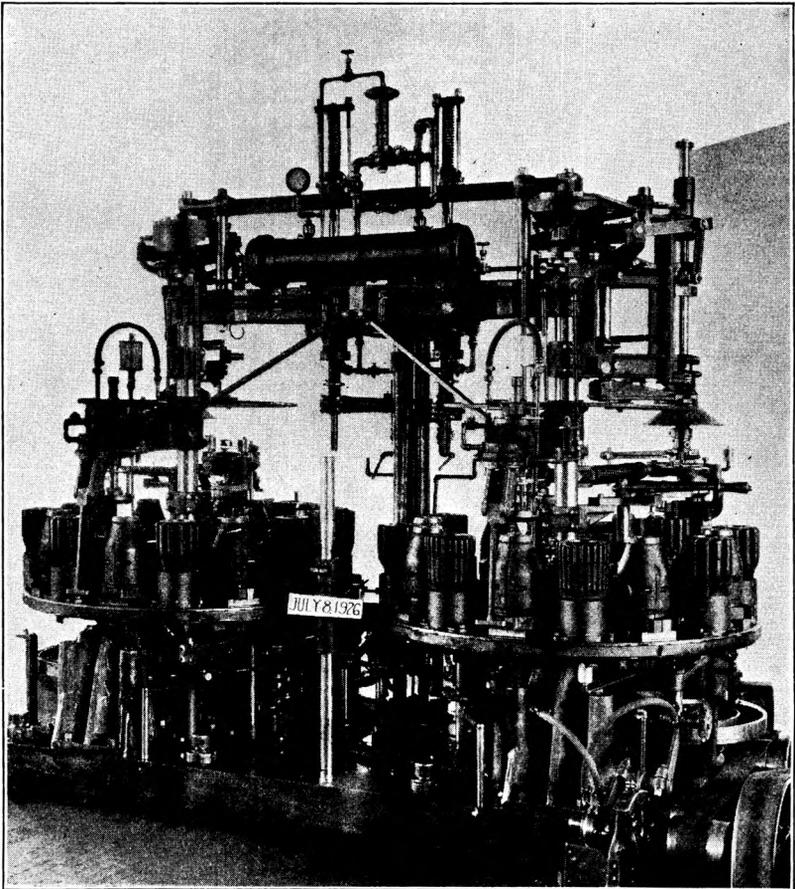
HARTFORD-EMPIRE MILK BOTTLE DOUBLE MACHINE
